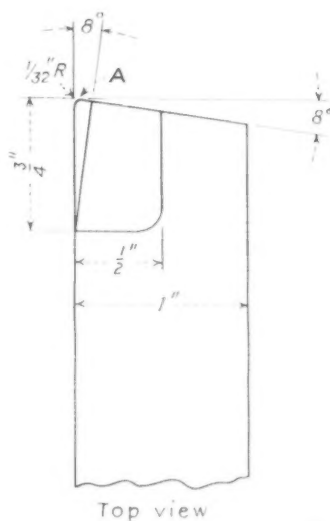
Carbide tipped lathe tool properly ground for the turning of steel tubing or any machine steel shafting.
